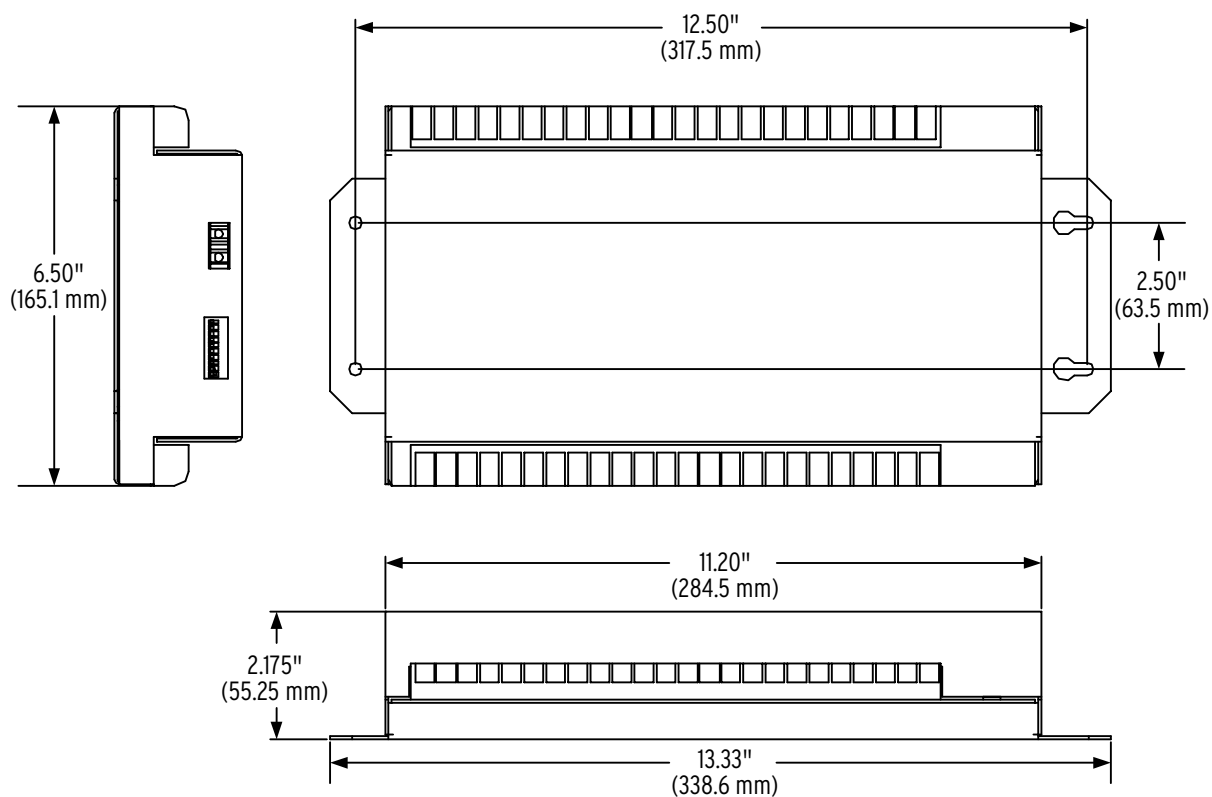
SEL-2505 Dimensions and Drill Diagram.
